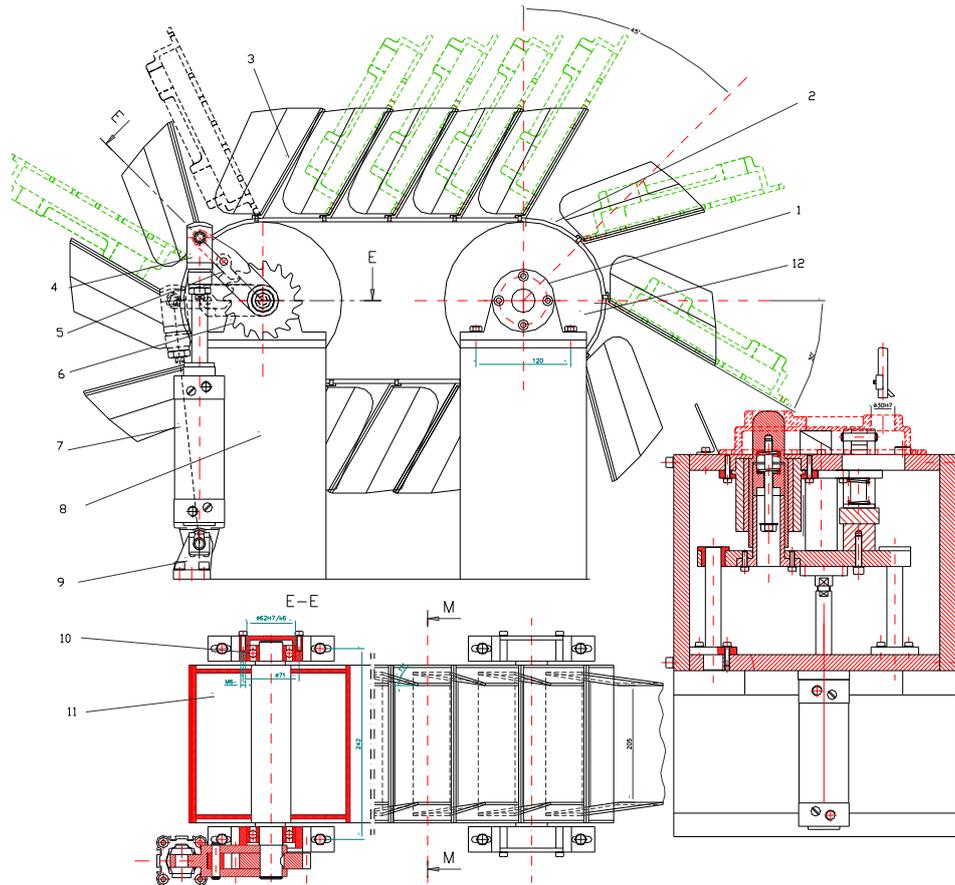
The 2D assembly model of the pieces continuous feeding device which is integrated in the manufacturing mechanized system
